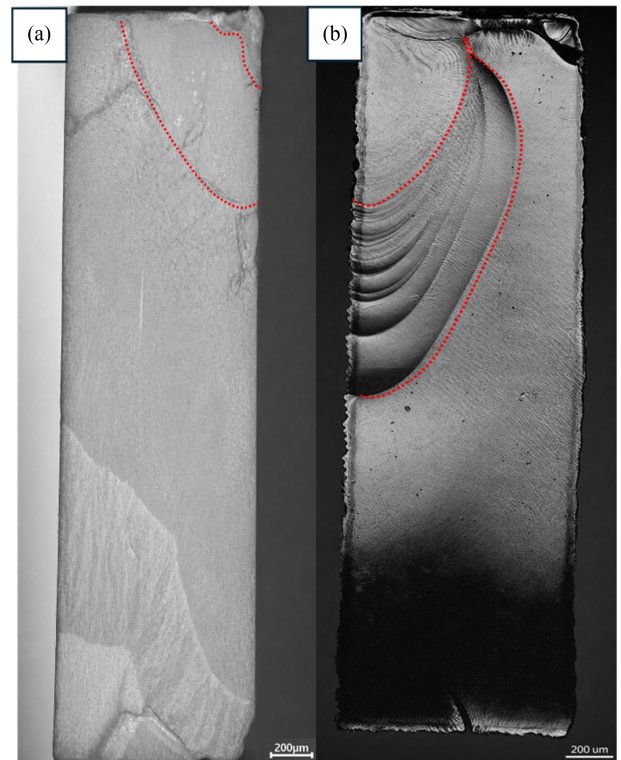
The overall view of the fatigue fracture surface (a) ABS, 5 MPa, 130,000 cycles, (b) Rigid black, 5 MPa, 185,000 cycles
